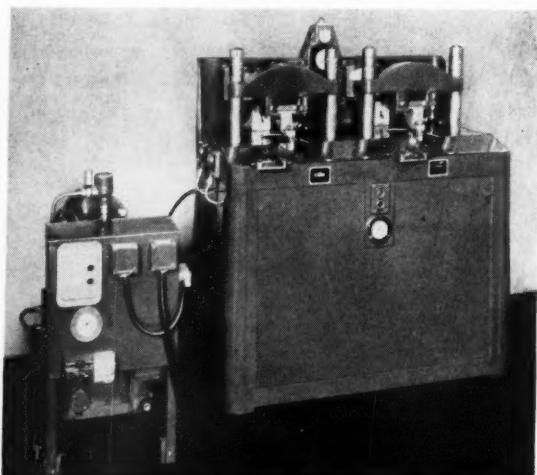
Cema machine of C. I. C. Engineering, Ltd., of England, with pressure and control unit at left
